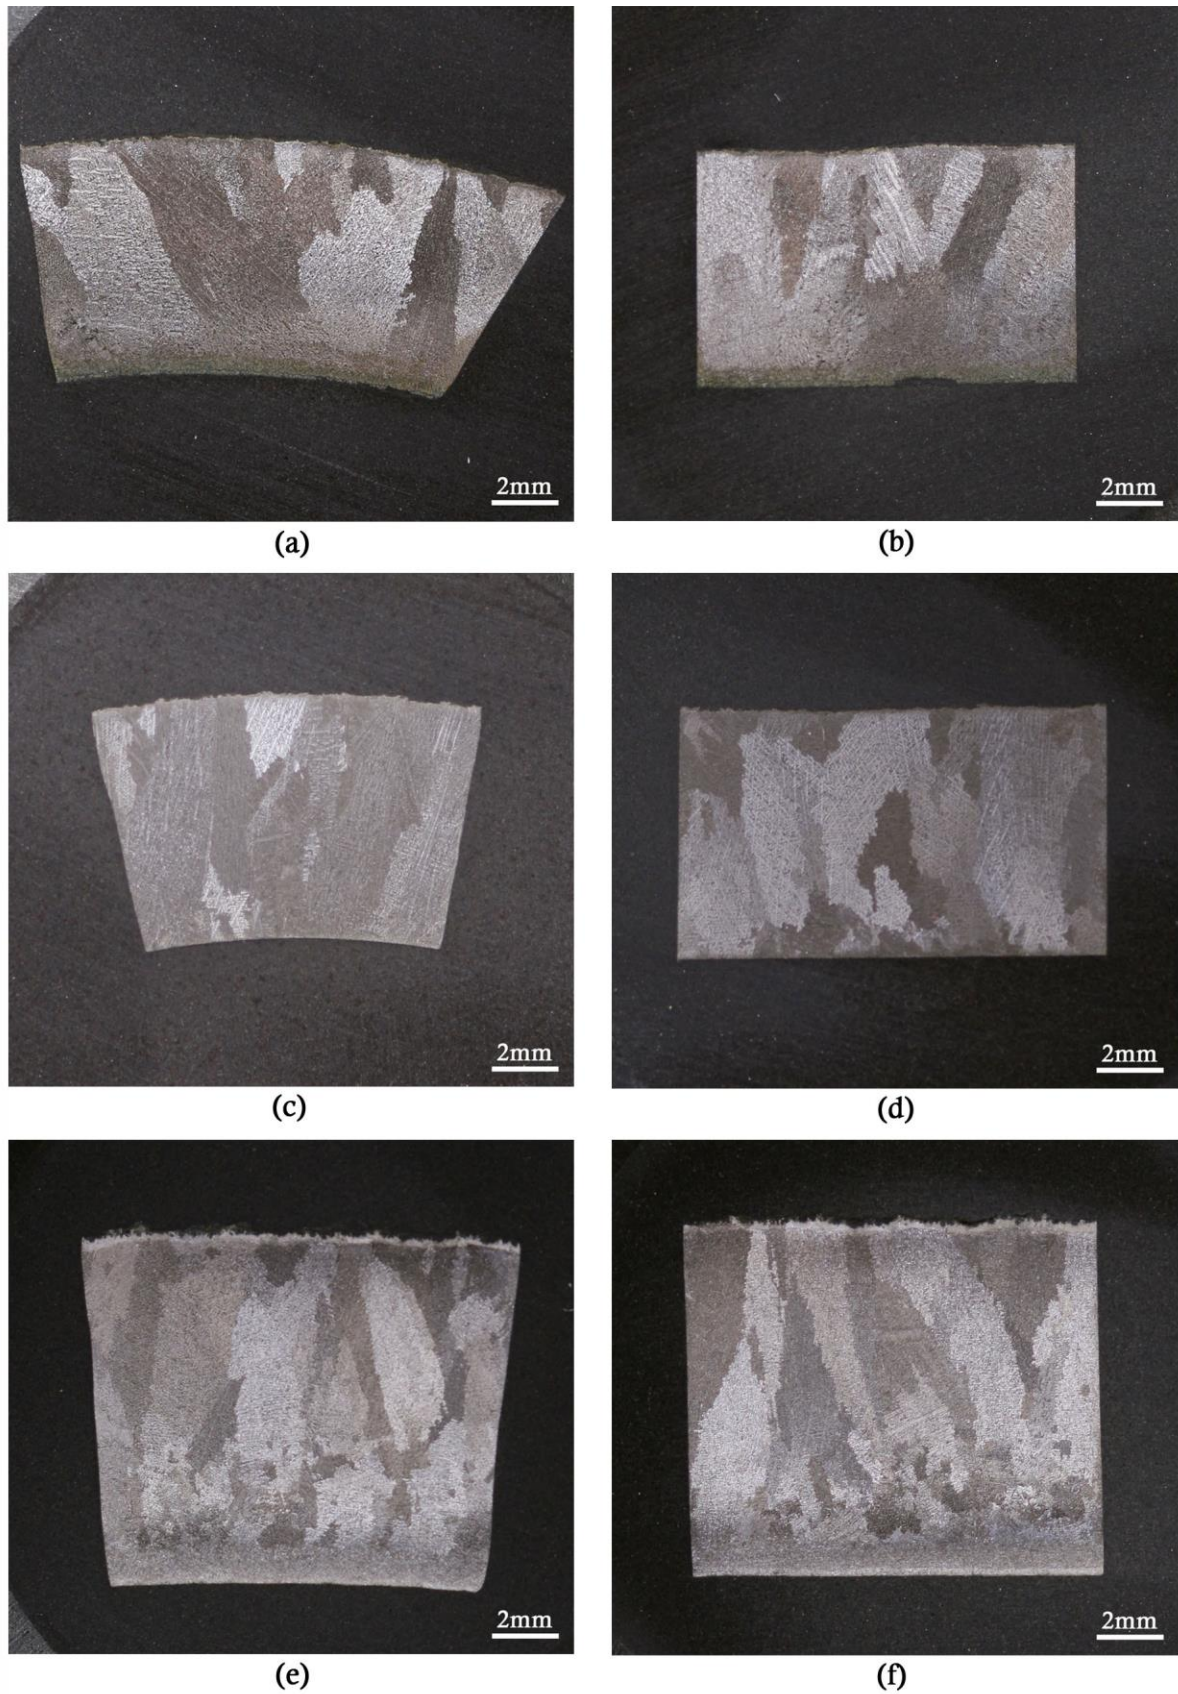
Low magnification images showing the macrostructure of (a) tube 2, axial face, (b) tube 2, longitudinal face, (c) tube 4, axial face, (d) tube 4, longitudinal face, (e) tube 6, axial face, and (f) tube 6, longitudinal face.
